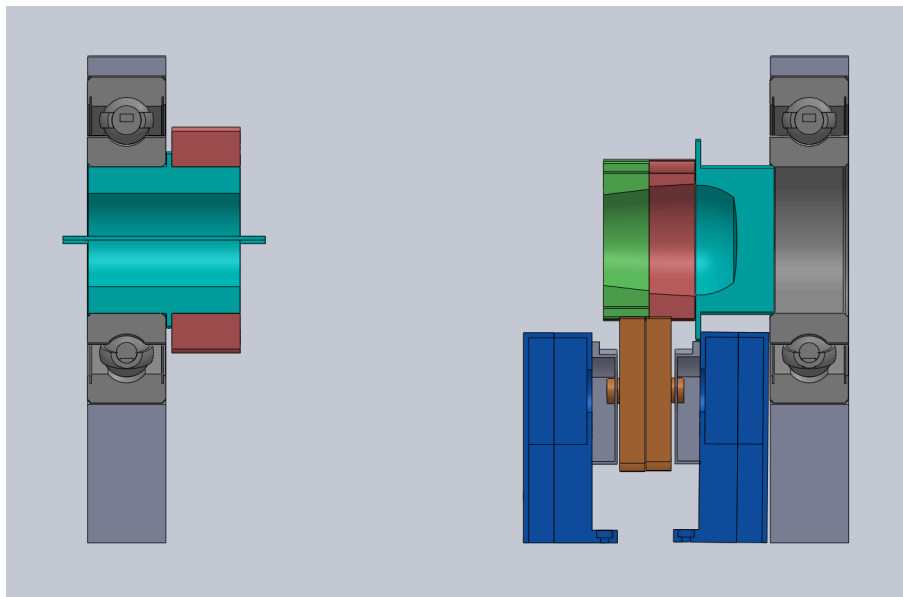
Cross-sectional view of the Solidworks assembly of the robotic catheter system.
